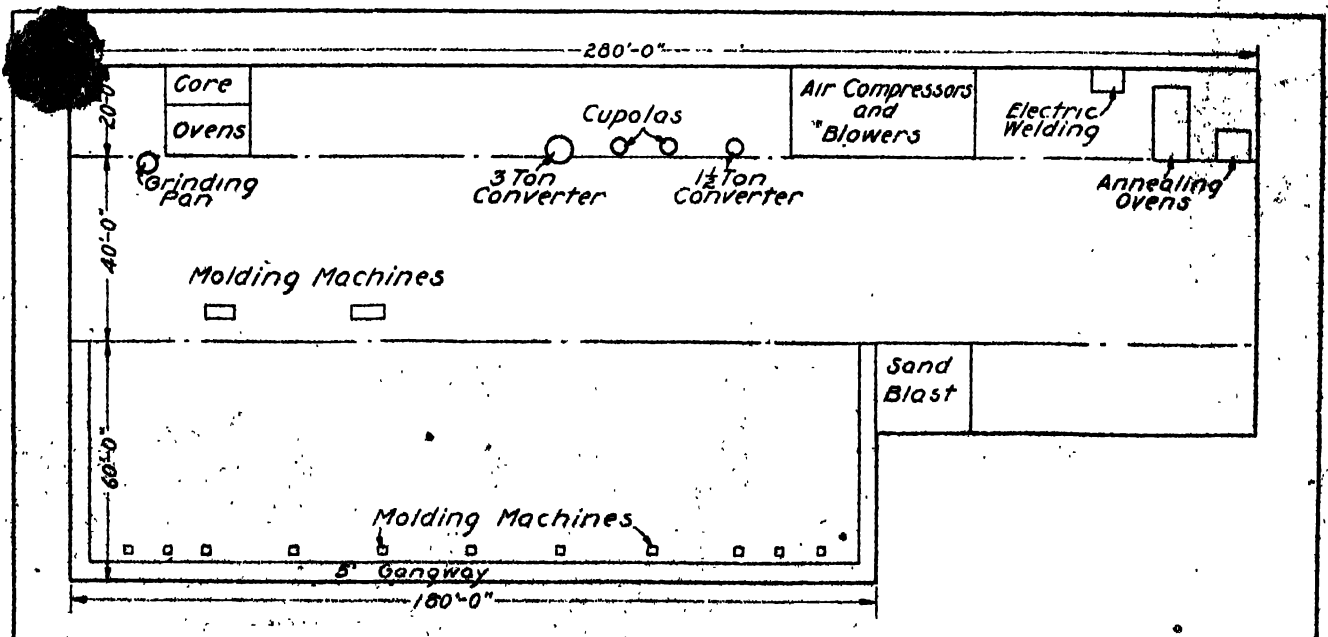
PLAN OF THE FOUNDRY SHOWING THE LOCATION OF MOLDING MACHINES, CORE ROOM, MELTING UNITS, POWER HOUSE AND ANNEALING OVENS
